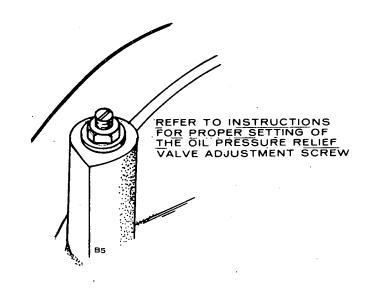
OIL PRESSURE RELIEF VALVE ADJUSTMENT
